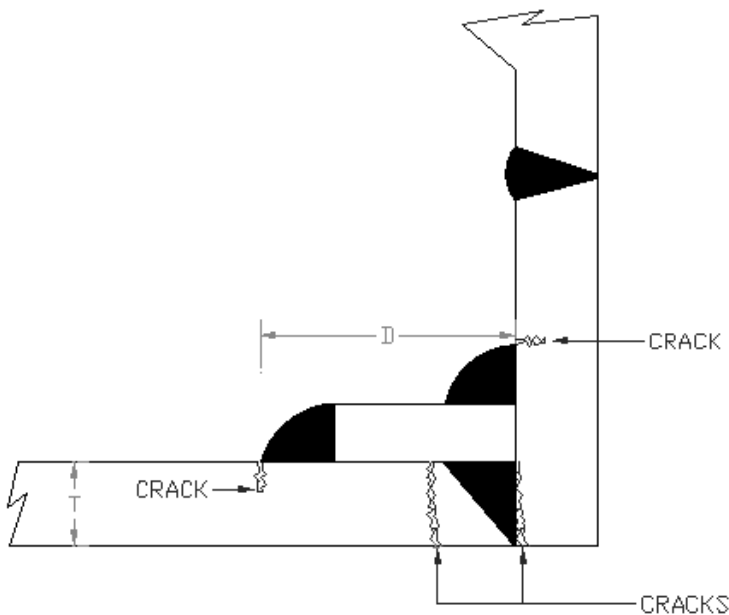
Schematic of Cracking in Full Penetration Welds Under Repads
